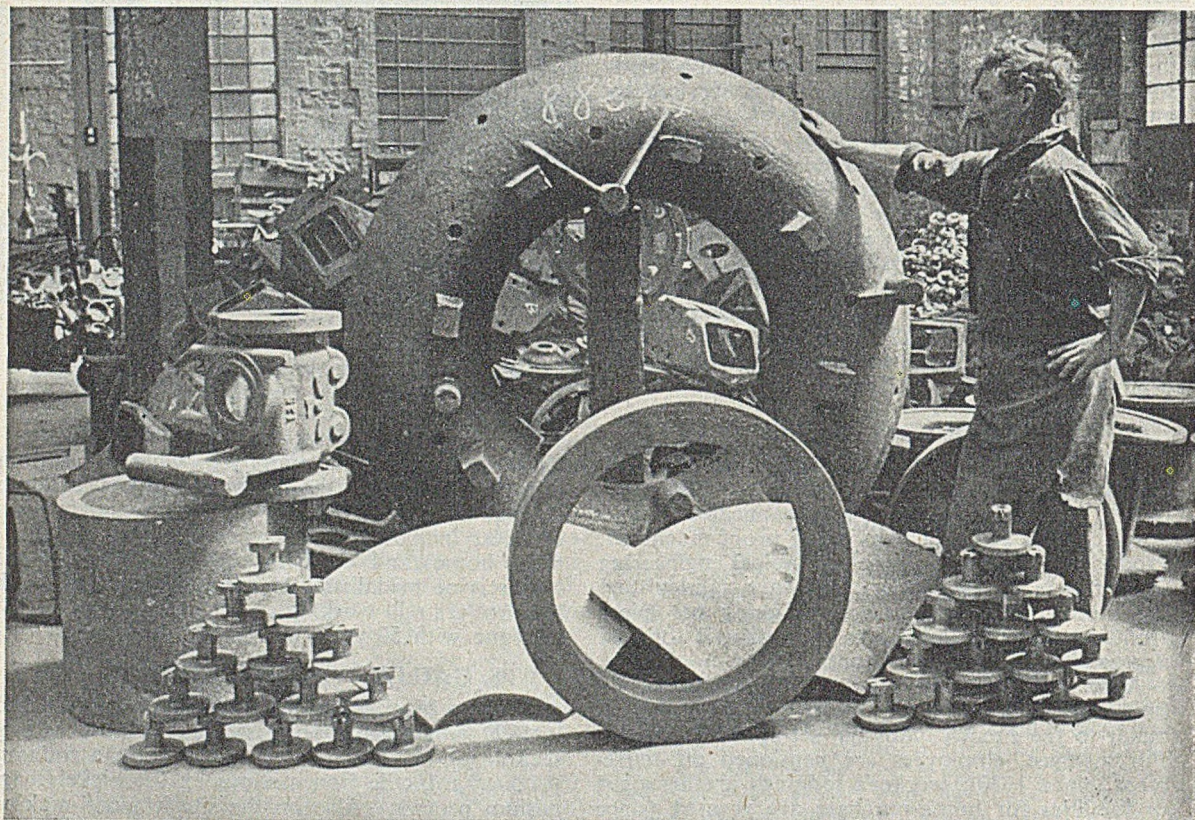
Group of Nodular Iron Castings, illustrating the Wide Range Manufactured in this Material by Gailly Frères.
